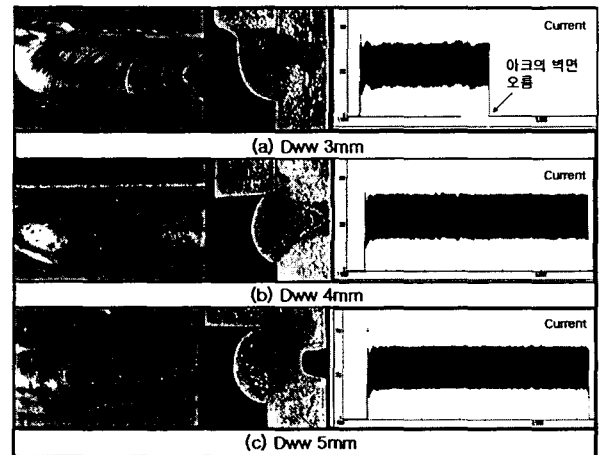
Bead appearance, cross section and current waveform (work angle: 0°, fillet welding)
